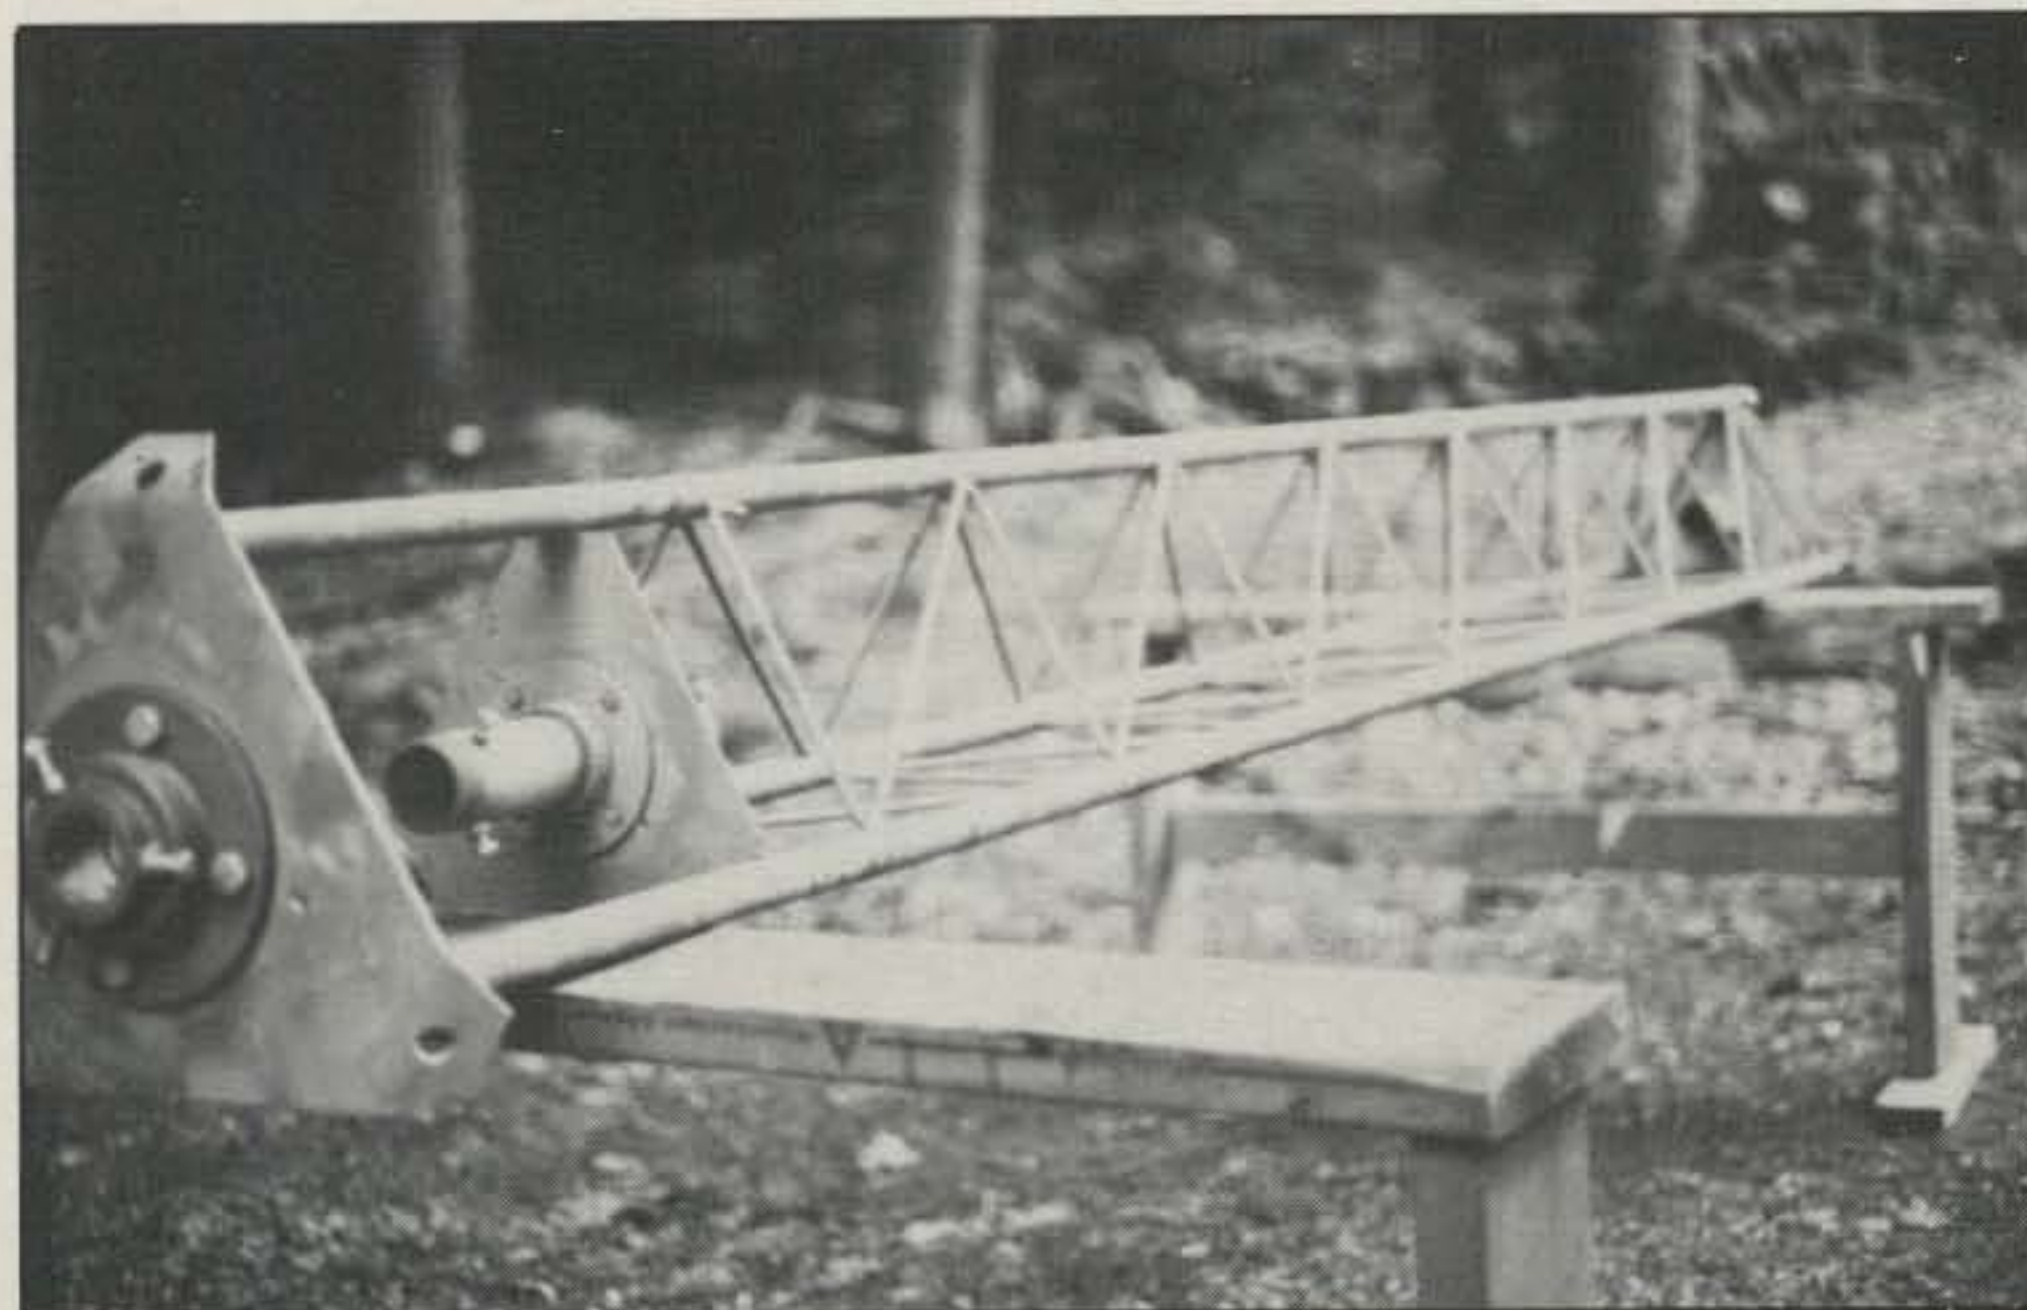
Inverted Rohn 25G top section with Rohn TB3 thrust bearing and pinning/clamping nipple flange arrangements on both ends of the tower section.
